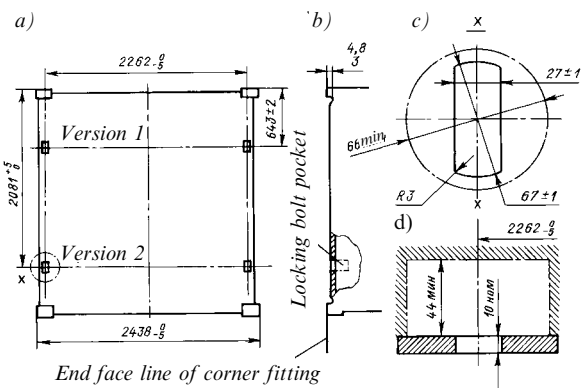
Location of additional seats used for attaching removable equipment to the container:
